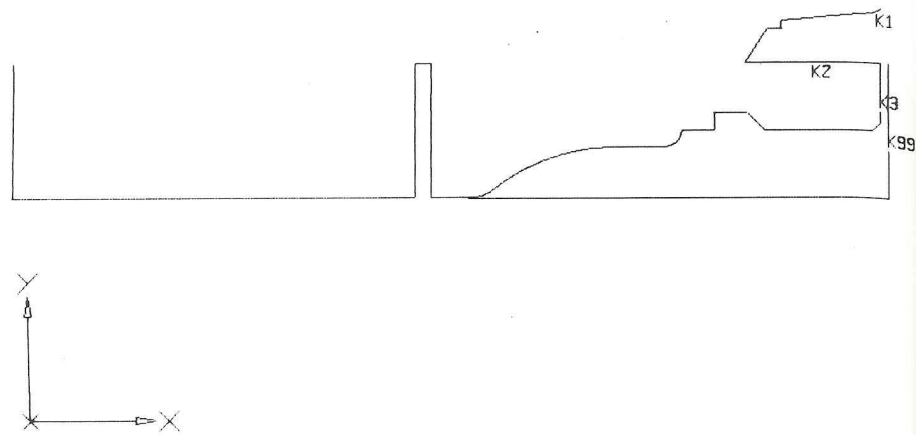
CAD part drawing reduced to required CAM profile curves.
